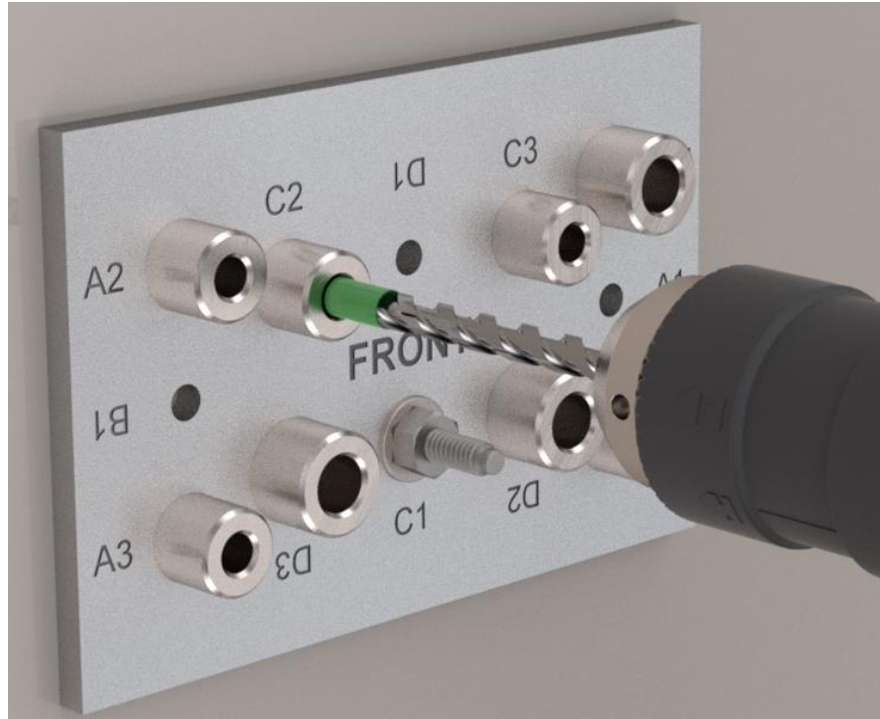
Drilling Second Hole Through Bushing C2 for Wedge Anchor
